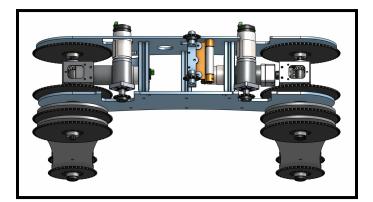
CAD model of tread and flipper assembly. The assembly does not reflect connection between flipper motors and chassis or chain systems.
